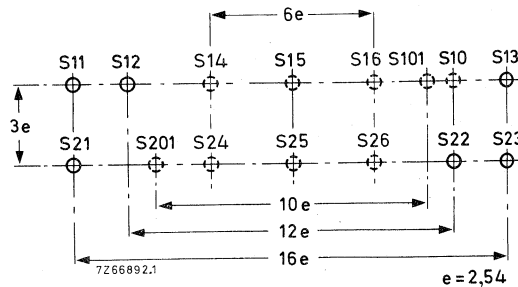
Hole pattern of the printed-wiring board for a tandem potentiometer (viewed on component side).
